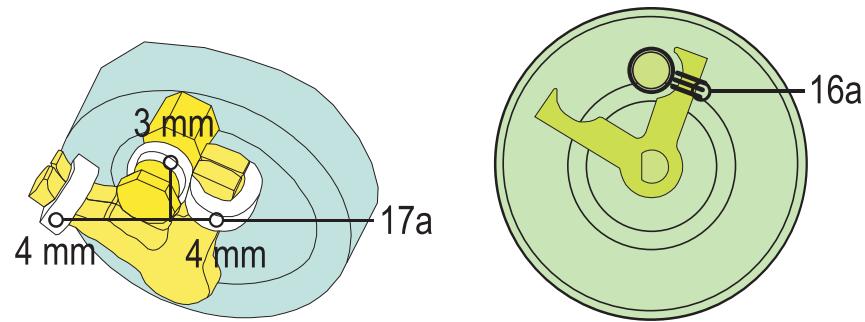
Front Door up to Serial Number 500,000, SAKA, SAKV-SG
